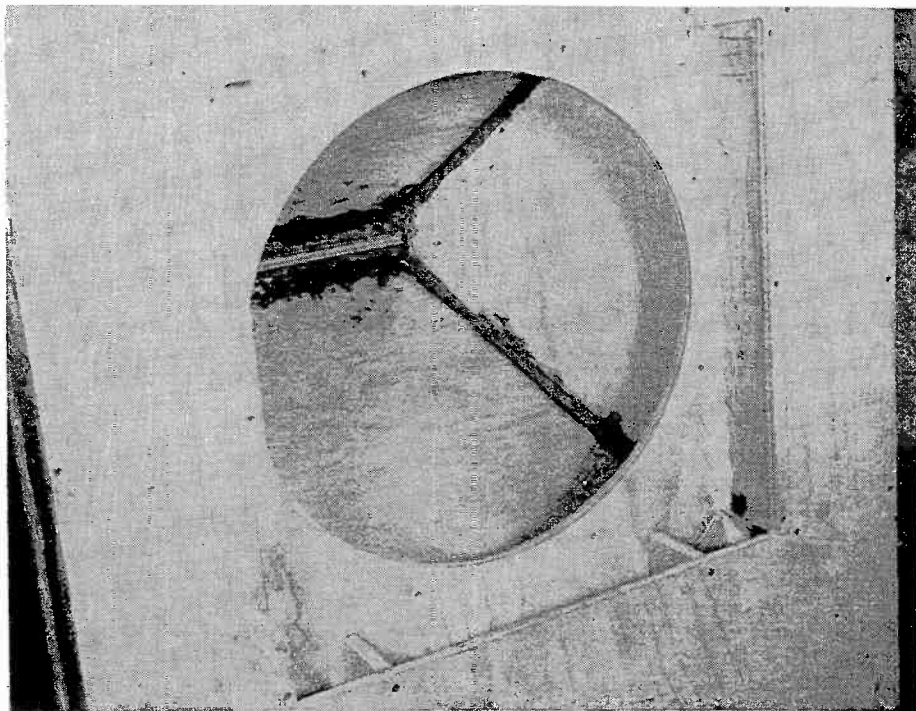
Over-all view of the completed dashpot cavity illustrates the calking technique. Author recommends making certain screws are long enough to hold tightly.
